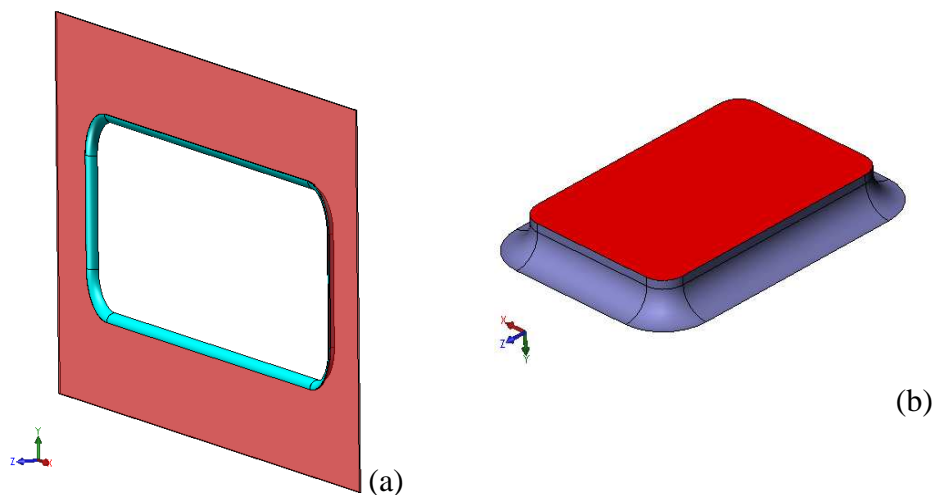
Main girder model3 (a) rimmed hole design; (b) rimmed hole forming tool
